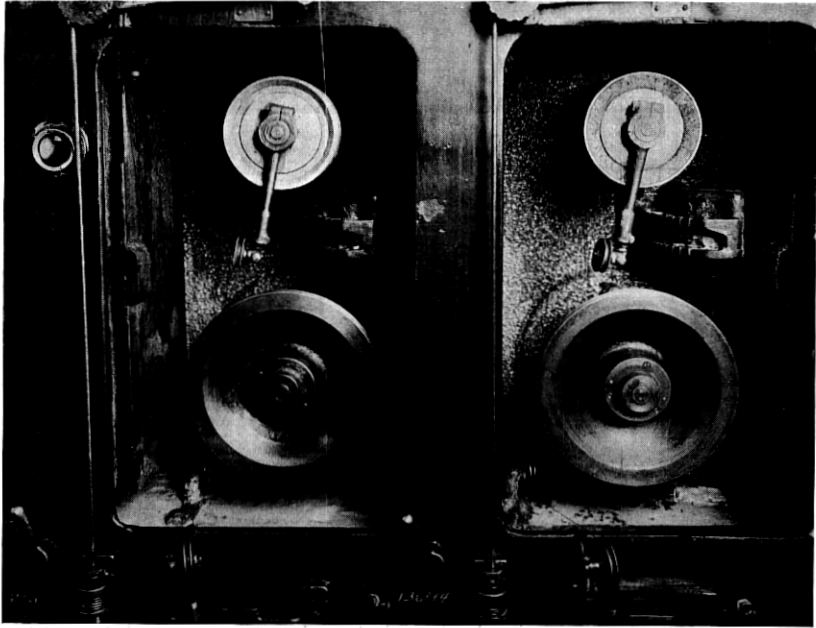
Close-up view of units of No. 3 wire drawing machine
